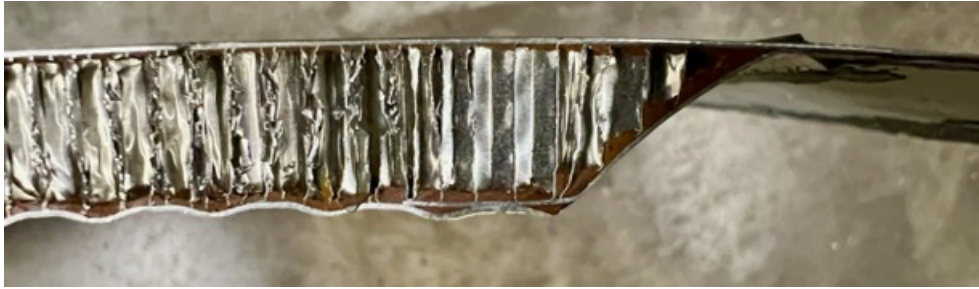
Cross sectional view of the manufactured edge of a CH146 Griffon aluminum honeycomb sandwich panel. At the edge, the core is tapered and facesheets are joined together into a laminated aluminum sheet that can be riveted or otherwise fastened to other structural members.
